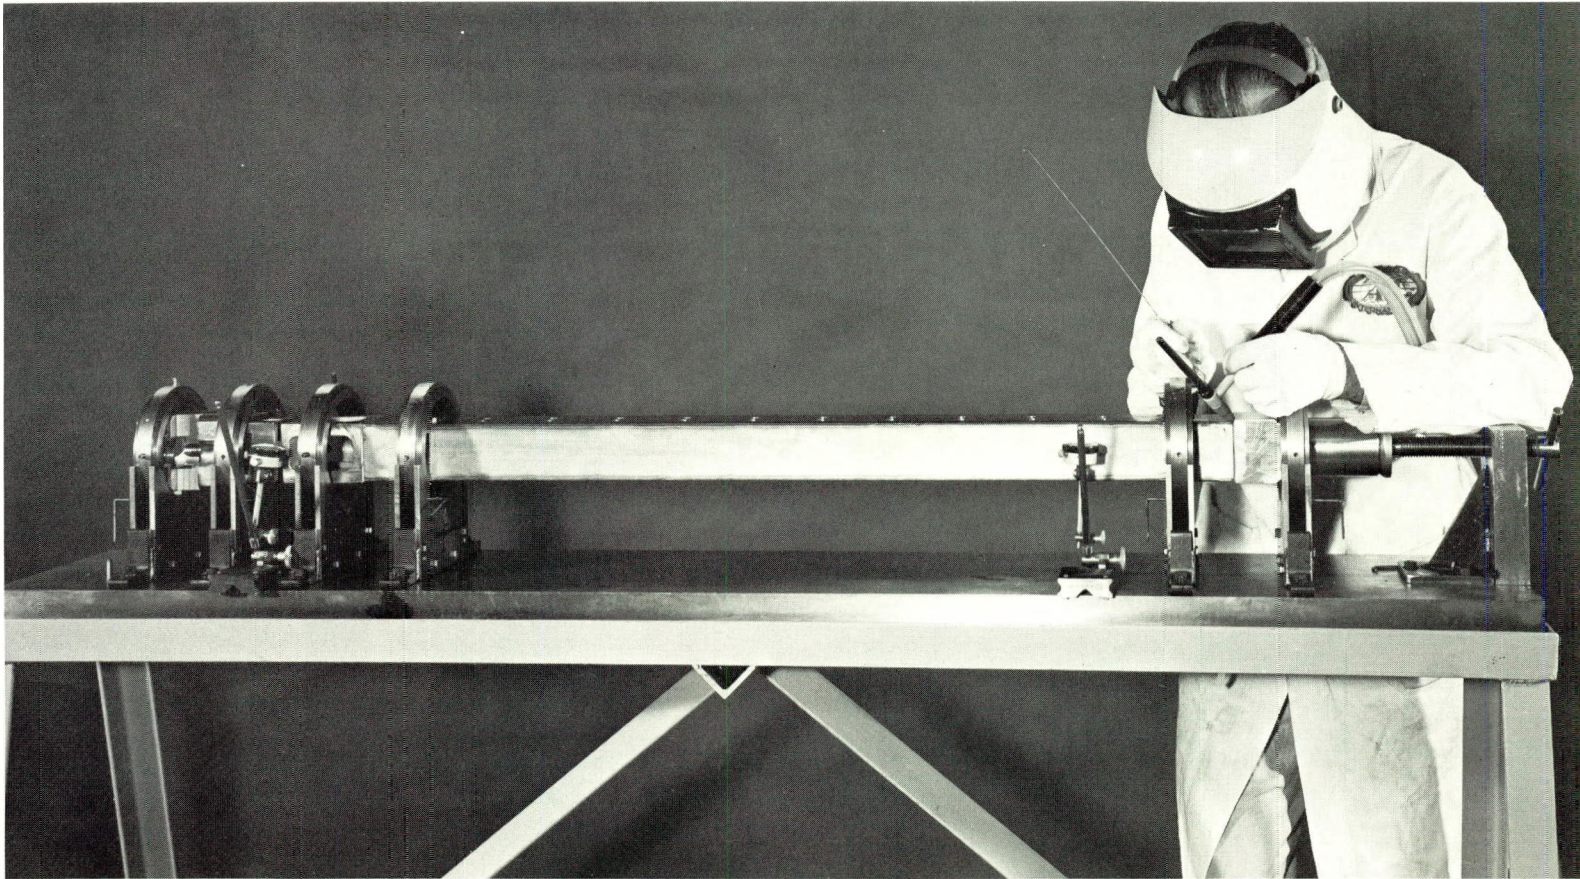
Welding End Casting on Fuel Box in Alignment Fixture
